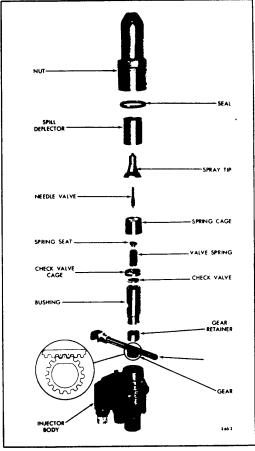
Injector Rack, Gear, Spray Tip and Valve Assembly Details and Relative Location of Parts
